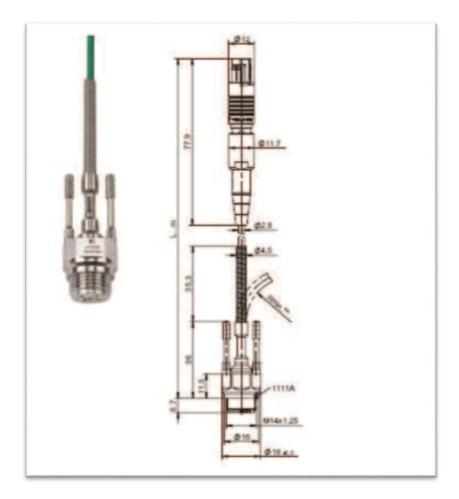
Exhaust manifold pressure sensor Kistler 4049B...DS
